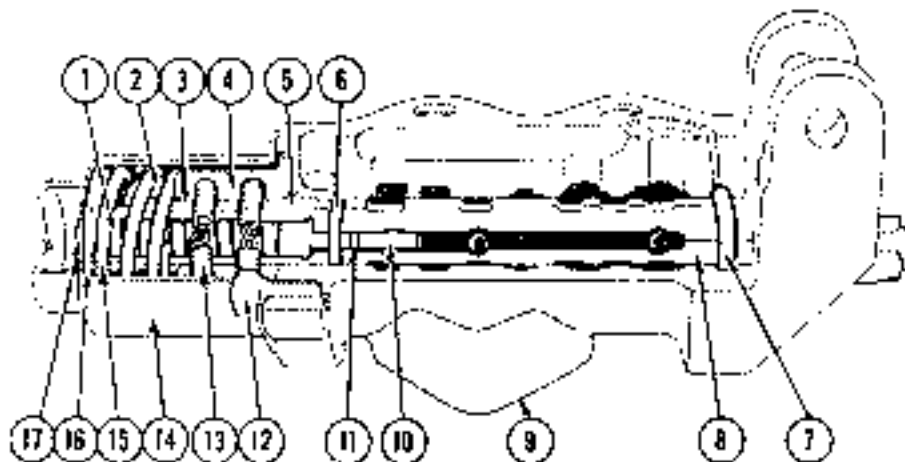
Cutaway view of the Pony hydraulic lift control valve.
